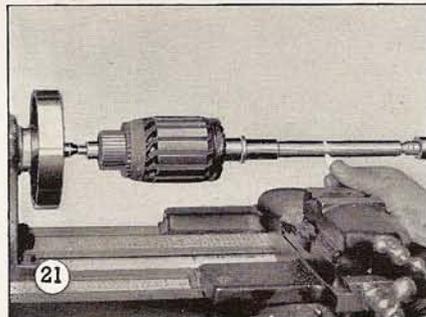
Close-up of Truing an Armature Commutator on the Lathe.
